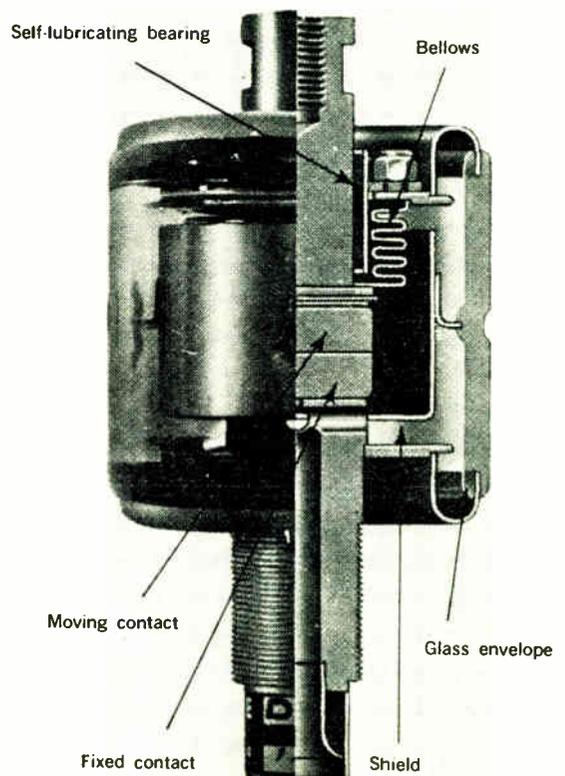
Section through a typical vacuum switch showing the principal components.
